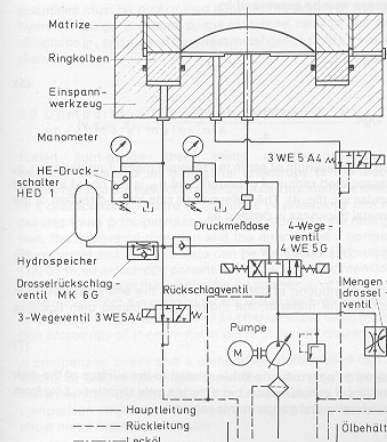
Diagrammatic lay-out of hydraulic bulge testing equipment
